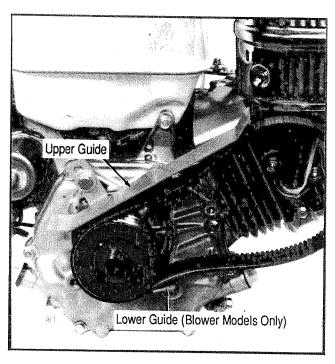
Engine-mounted Belt Guides (engine removed from chassis for photo)
